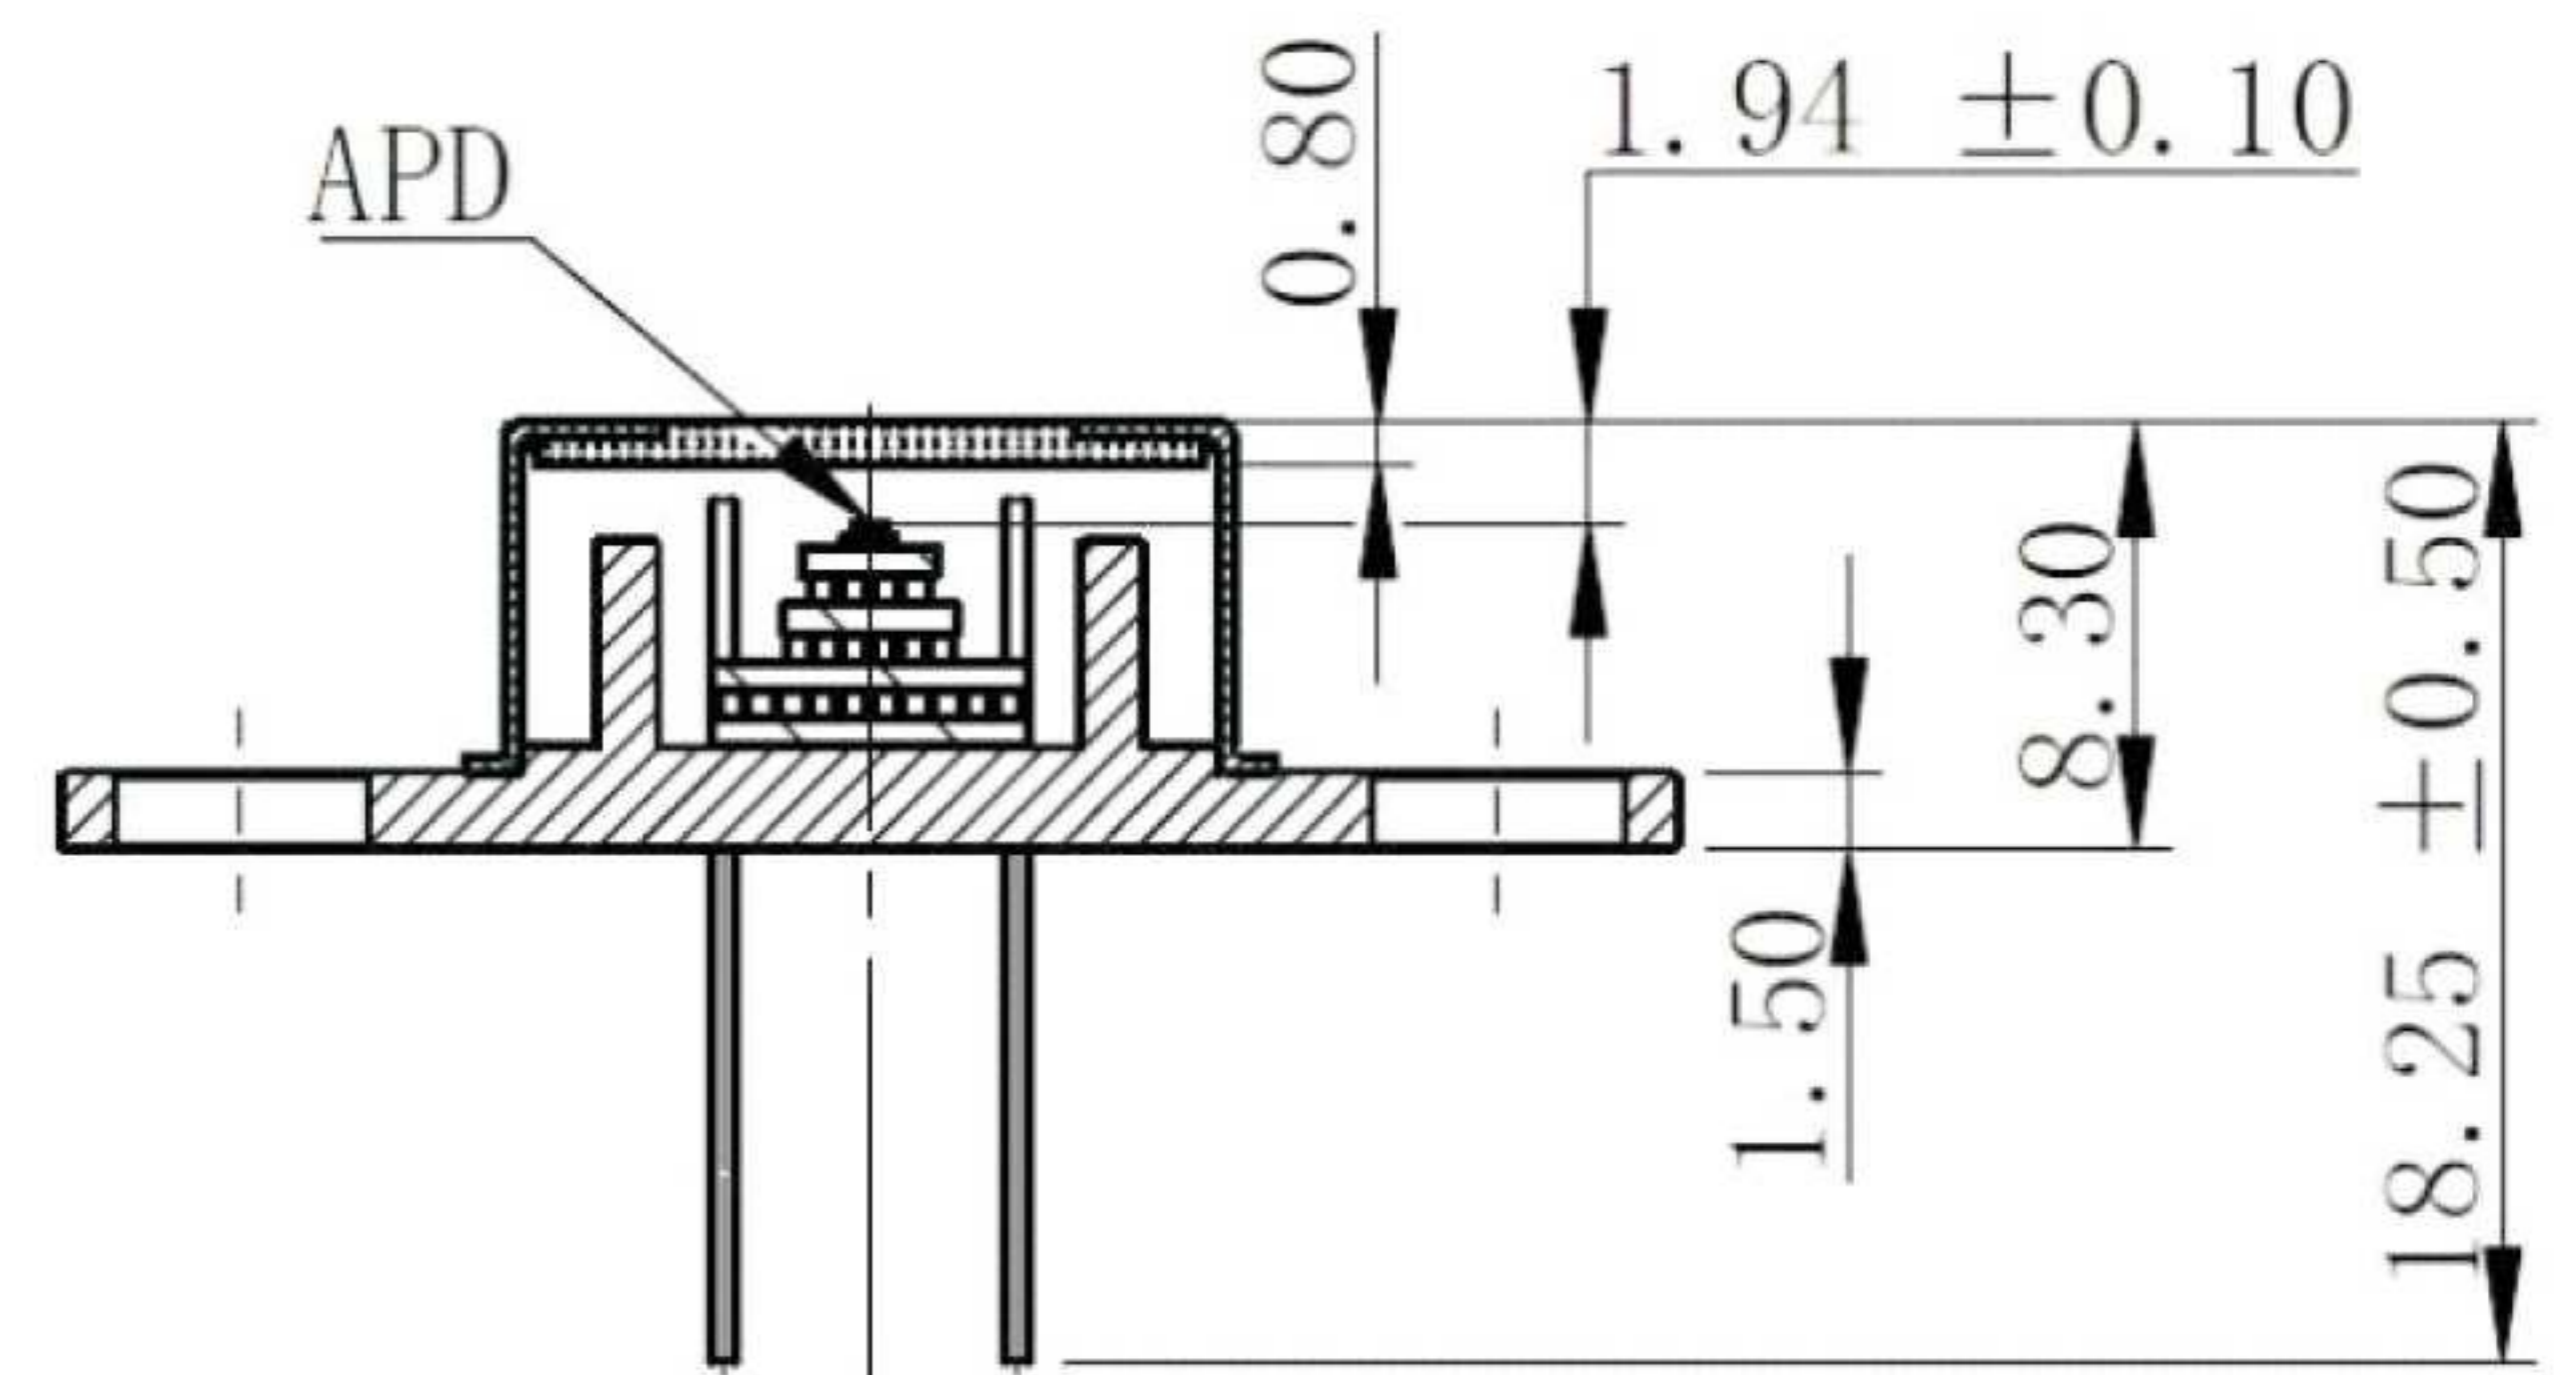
mechanical dimension 2 (Unmarked tolerance $\pm 0.1\text{mm}$)
